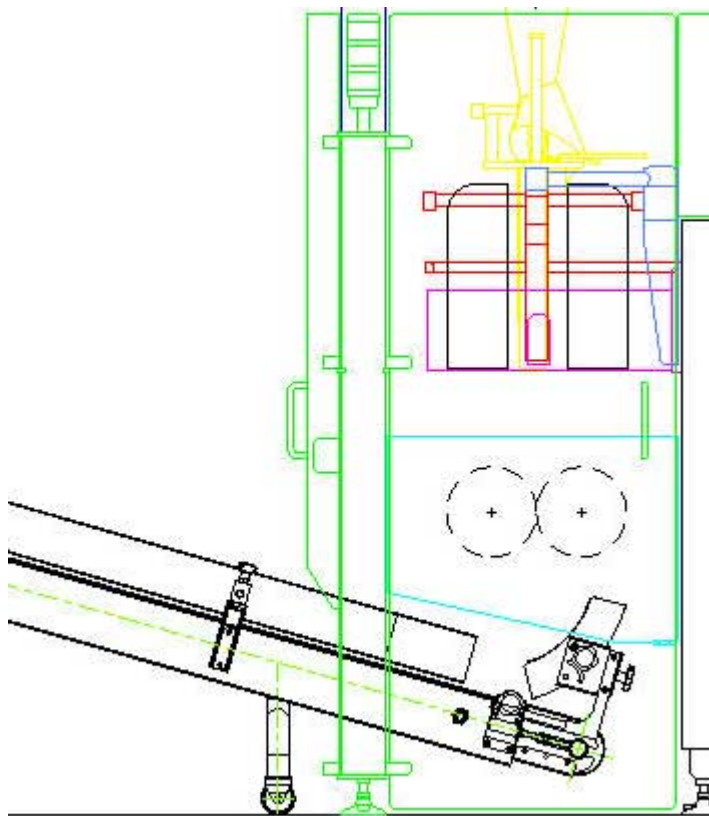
Bag Forming Tube with Jaws (shown as 2 circles), Curved Infeed and Inclined Conveyor
